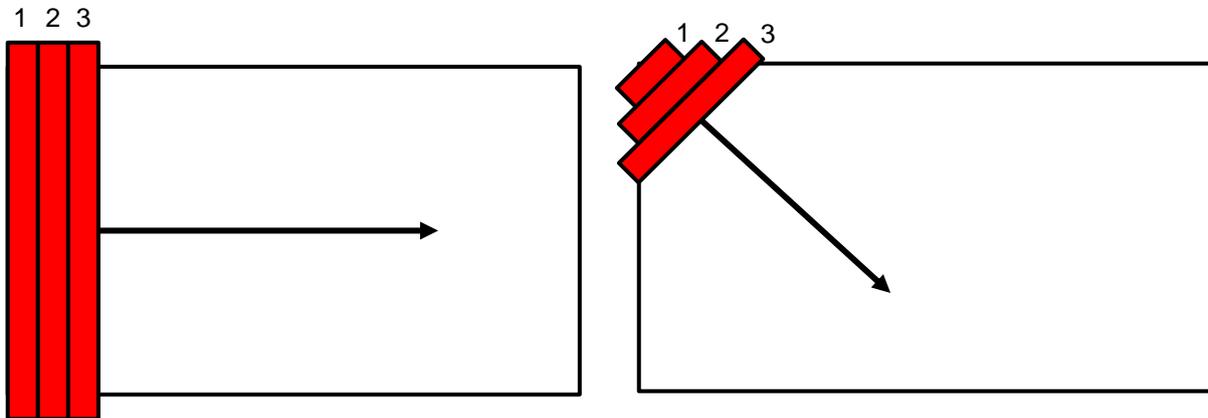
standard tape placement pattern; left: 90°-layer, right: 45°-layer
